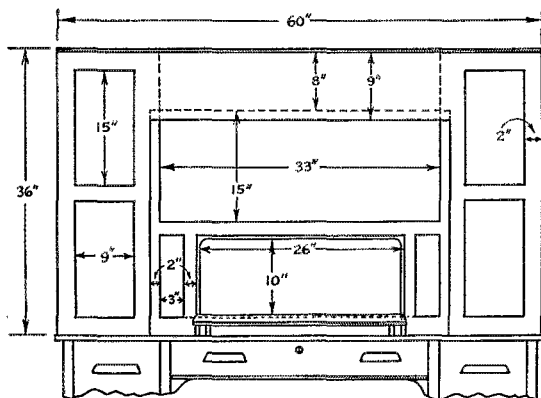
FRONT-VIEW DRAWING, WITH DIMENSIONS OF THE DESK-TOP OPERATING CABINET SHOWN IN THE PHOTOGRAPH
